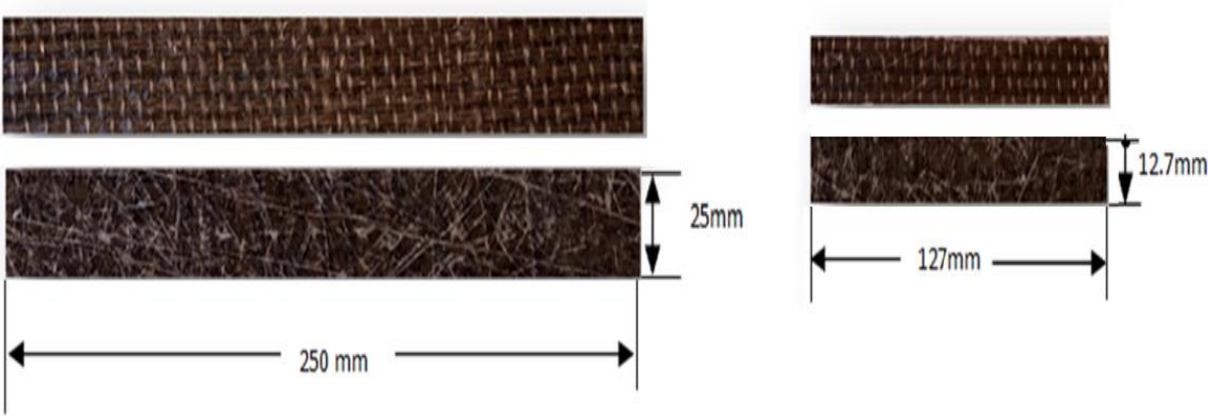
Sspecimens dimension of test traction and flexion for two methods a) ASTM-D 3039,b) see left ofspecimensASTM-D790.
